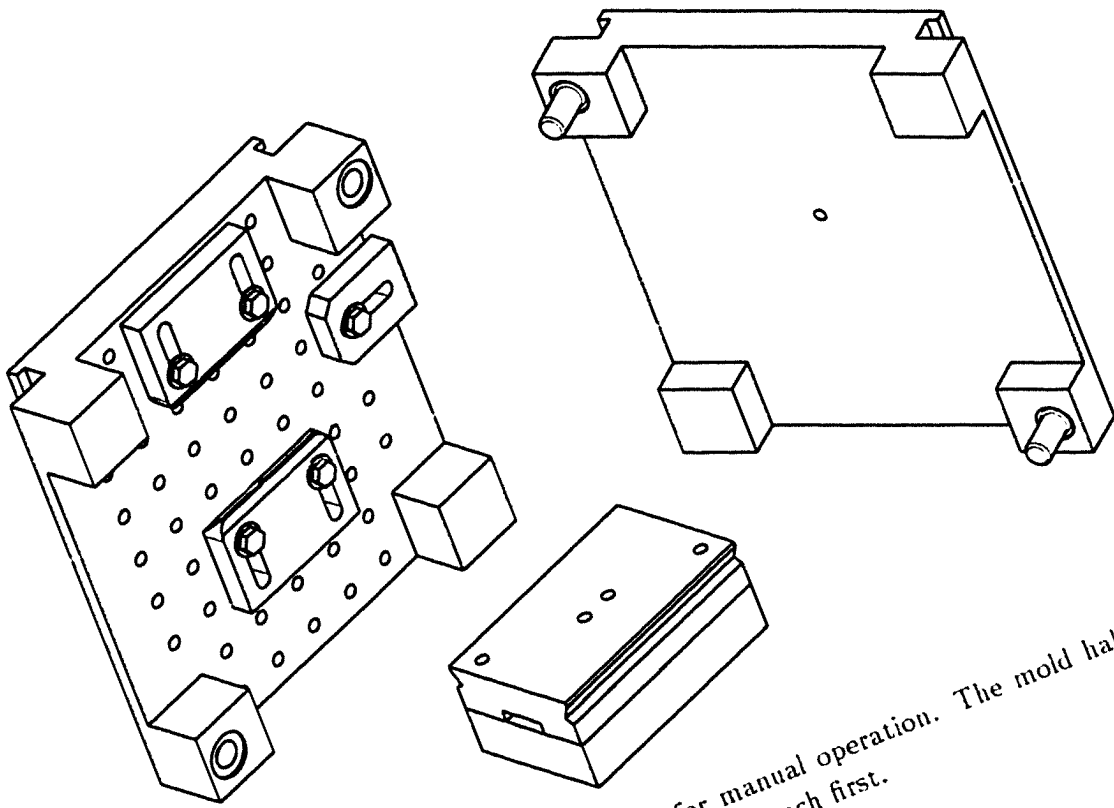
Mold base assembly for manual operation. The mold halves are assembled on the workbench first.
